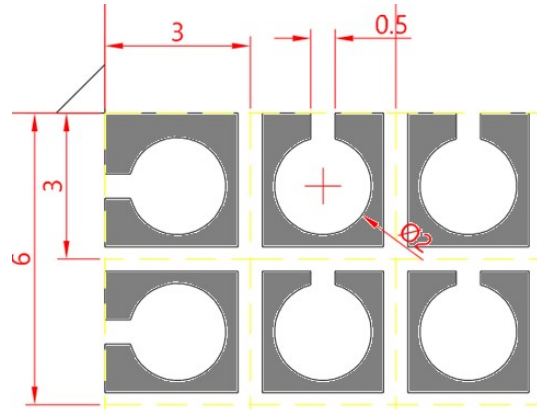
Schematic layout and dimensional parameters of the Ag top electrode (dimensions in mm).
